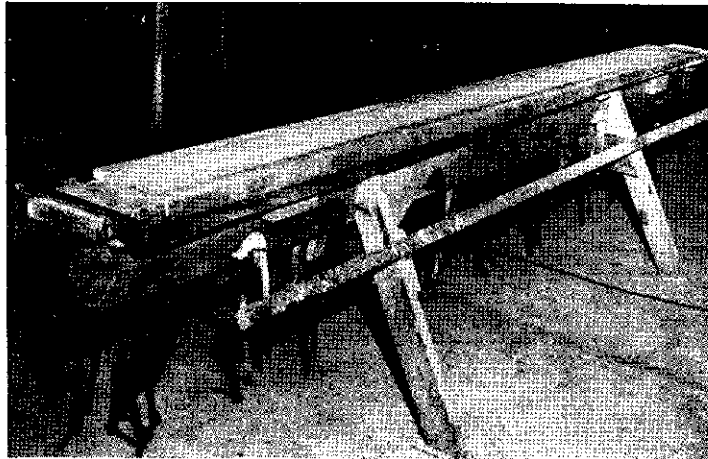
BLADE WORK BENCH. Note the handy way of storing "C" clamps and pressure strips. Waxed paper in place, the blade is ready for gluing.
